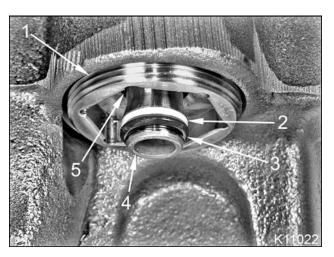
Injector oil inlet adapter installed in high-pressure oil rail
